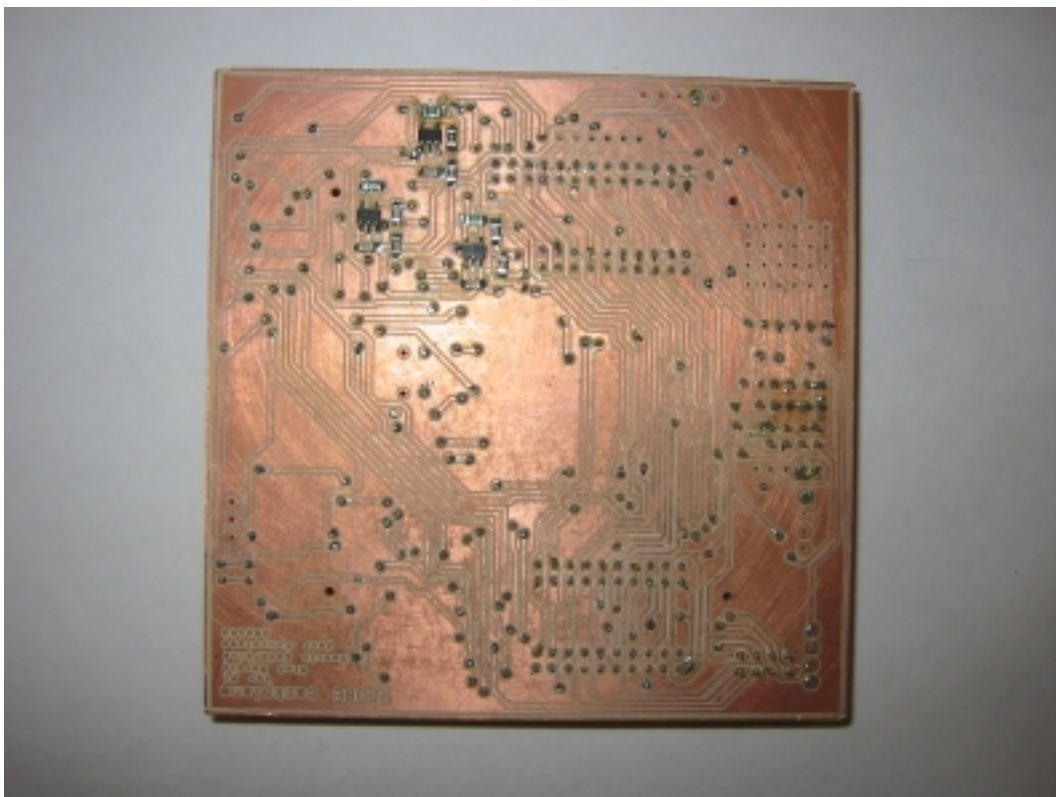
Bottom side of the power management board. This side has some IC's and routing.
